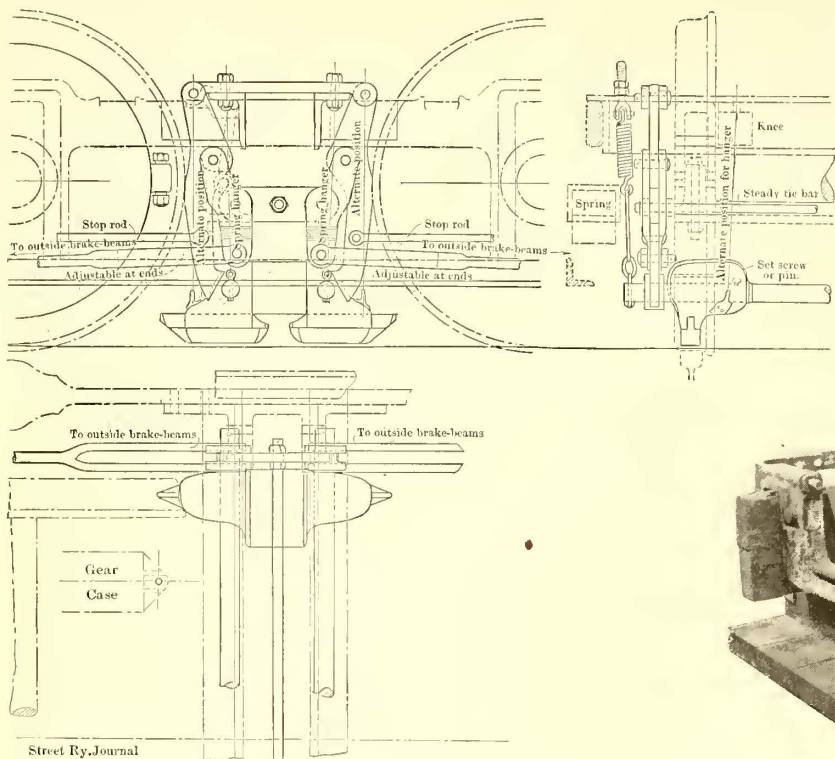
SKETCH FOR ATTACHMENT OF SEPARATE WESTINGHOUSE MAGNETIC BRAKE RIGGING
